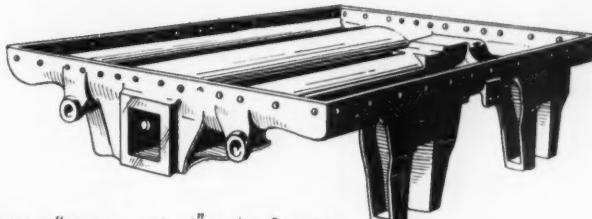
Bottom view of late-type flat-bottom underframe with upstanding flange
